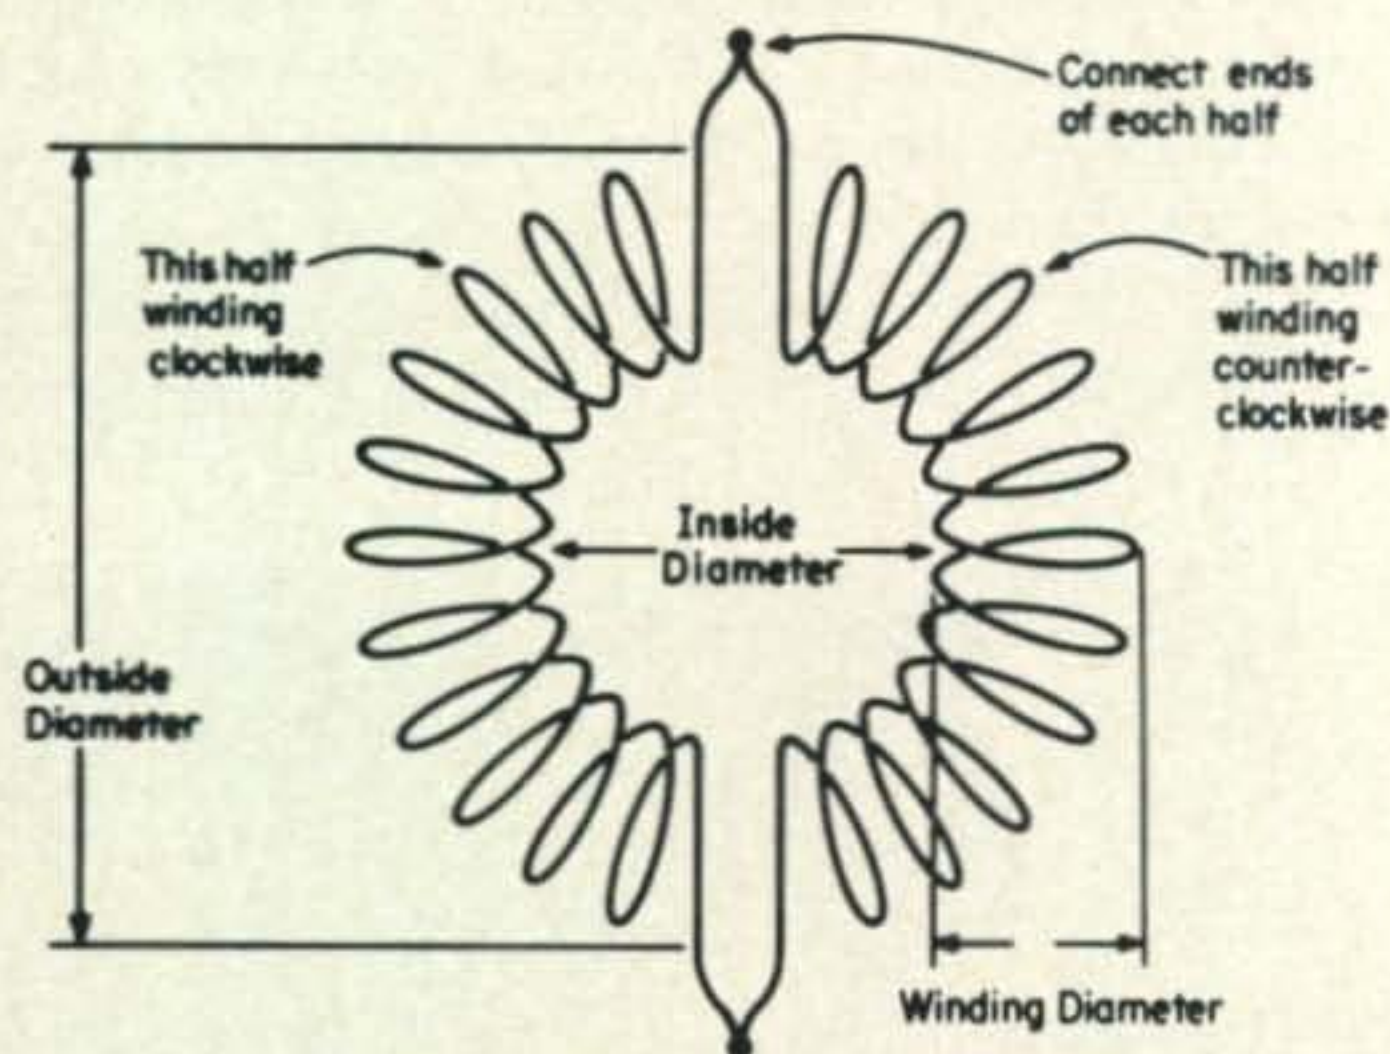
Coil winding details for the Table Top Maxi Linear.
